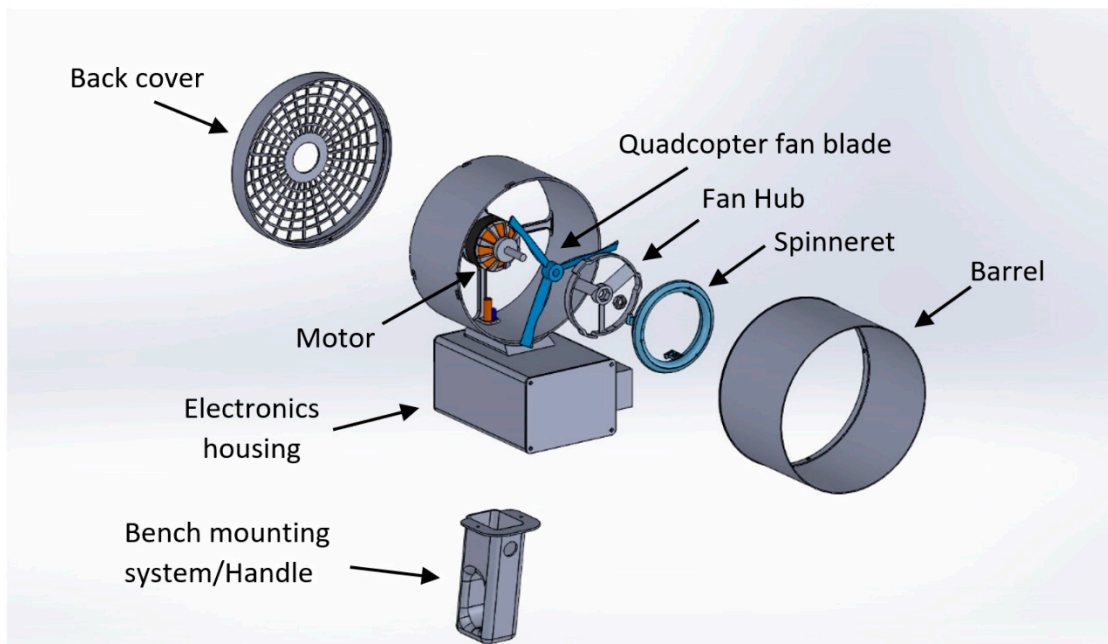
Exploded view of the Handheld Device (HD), showing its main components.
